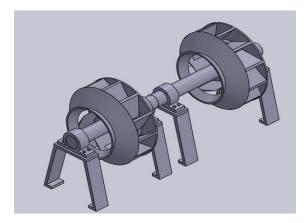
, Lift and thruster impeller assembly on stand (isometric view)
